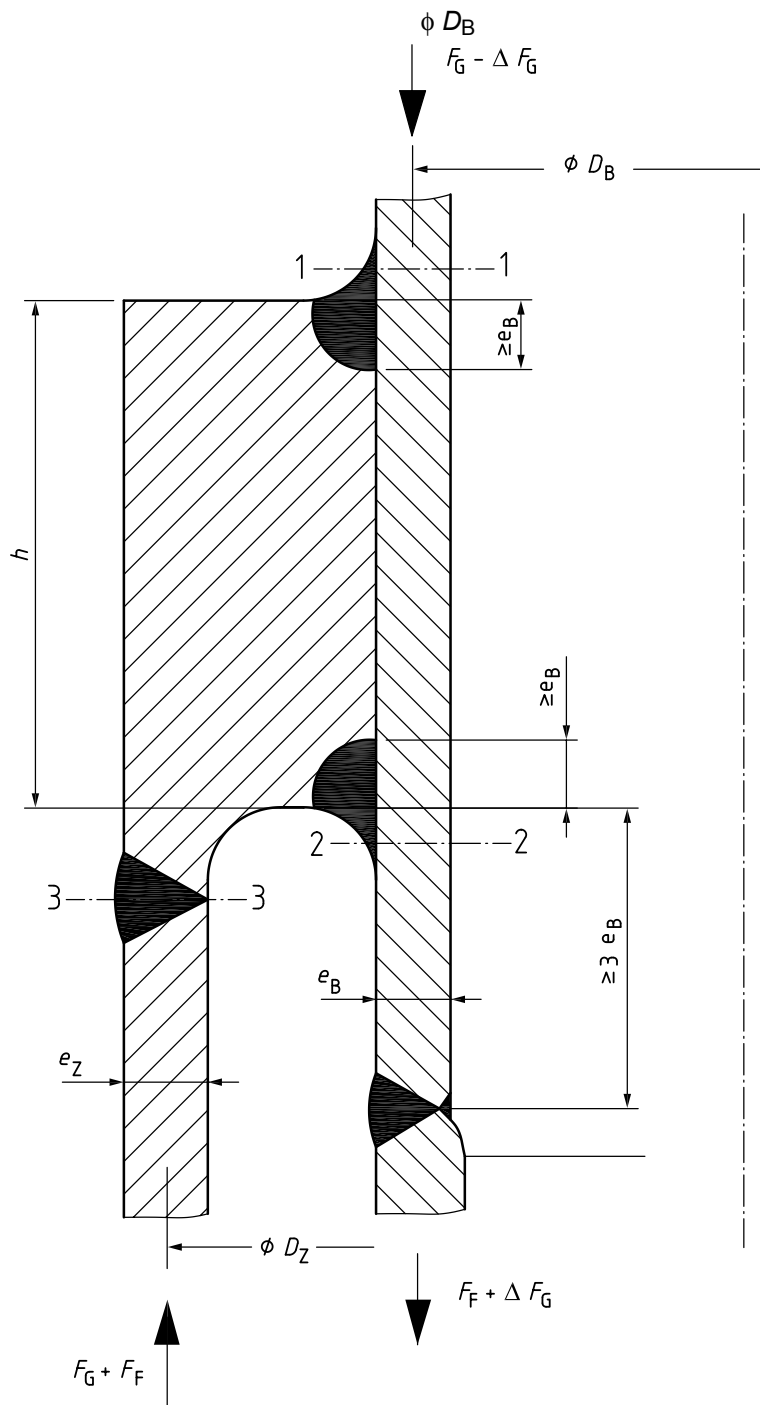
Shape A: Skirt connection with supporting ring
